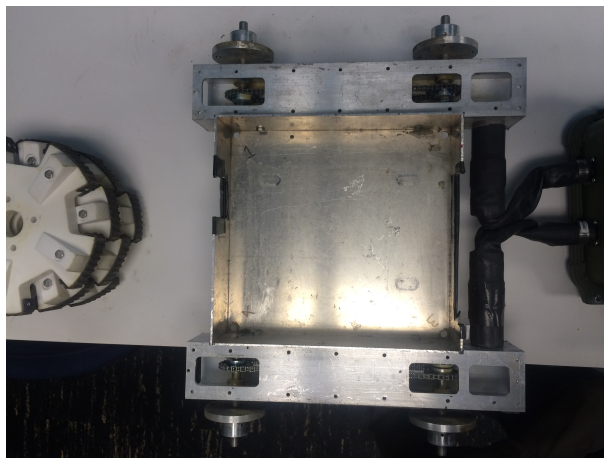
The chassis is formed of three separate components, the two transmissions and the base, allowing for easy system modification.
